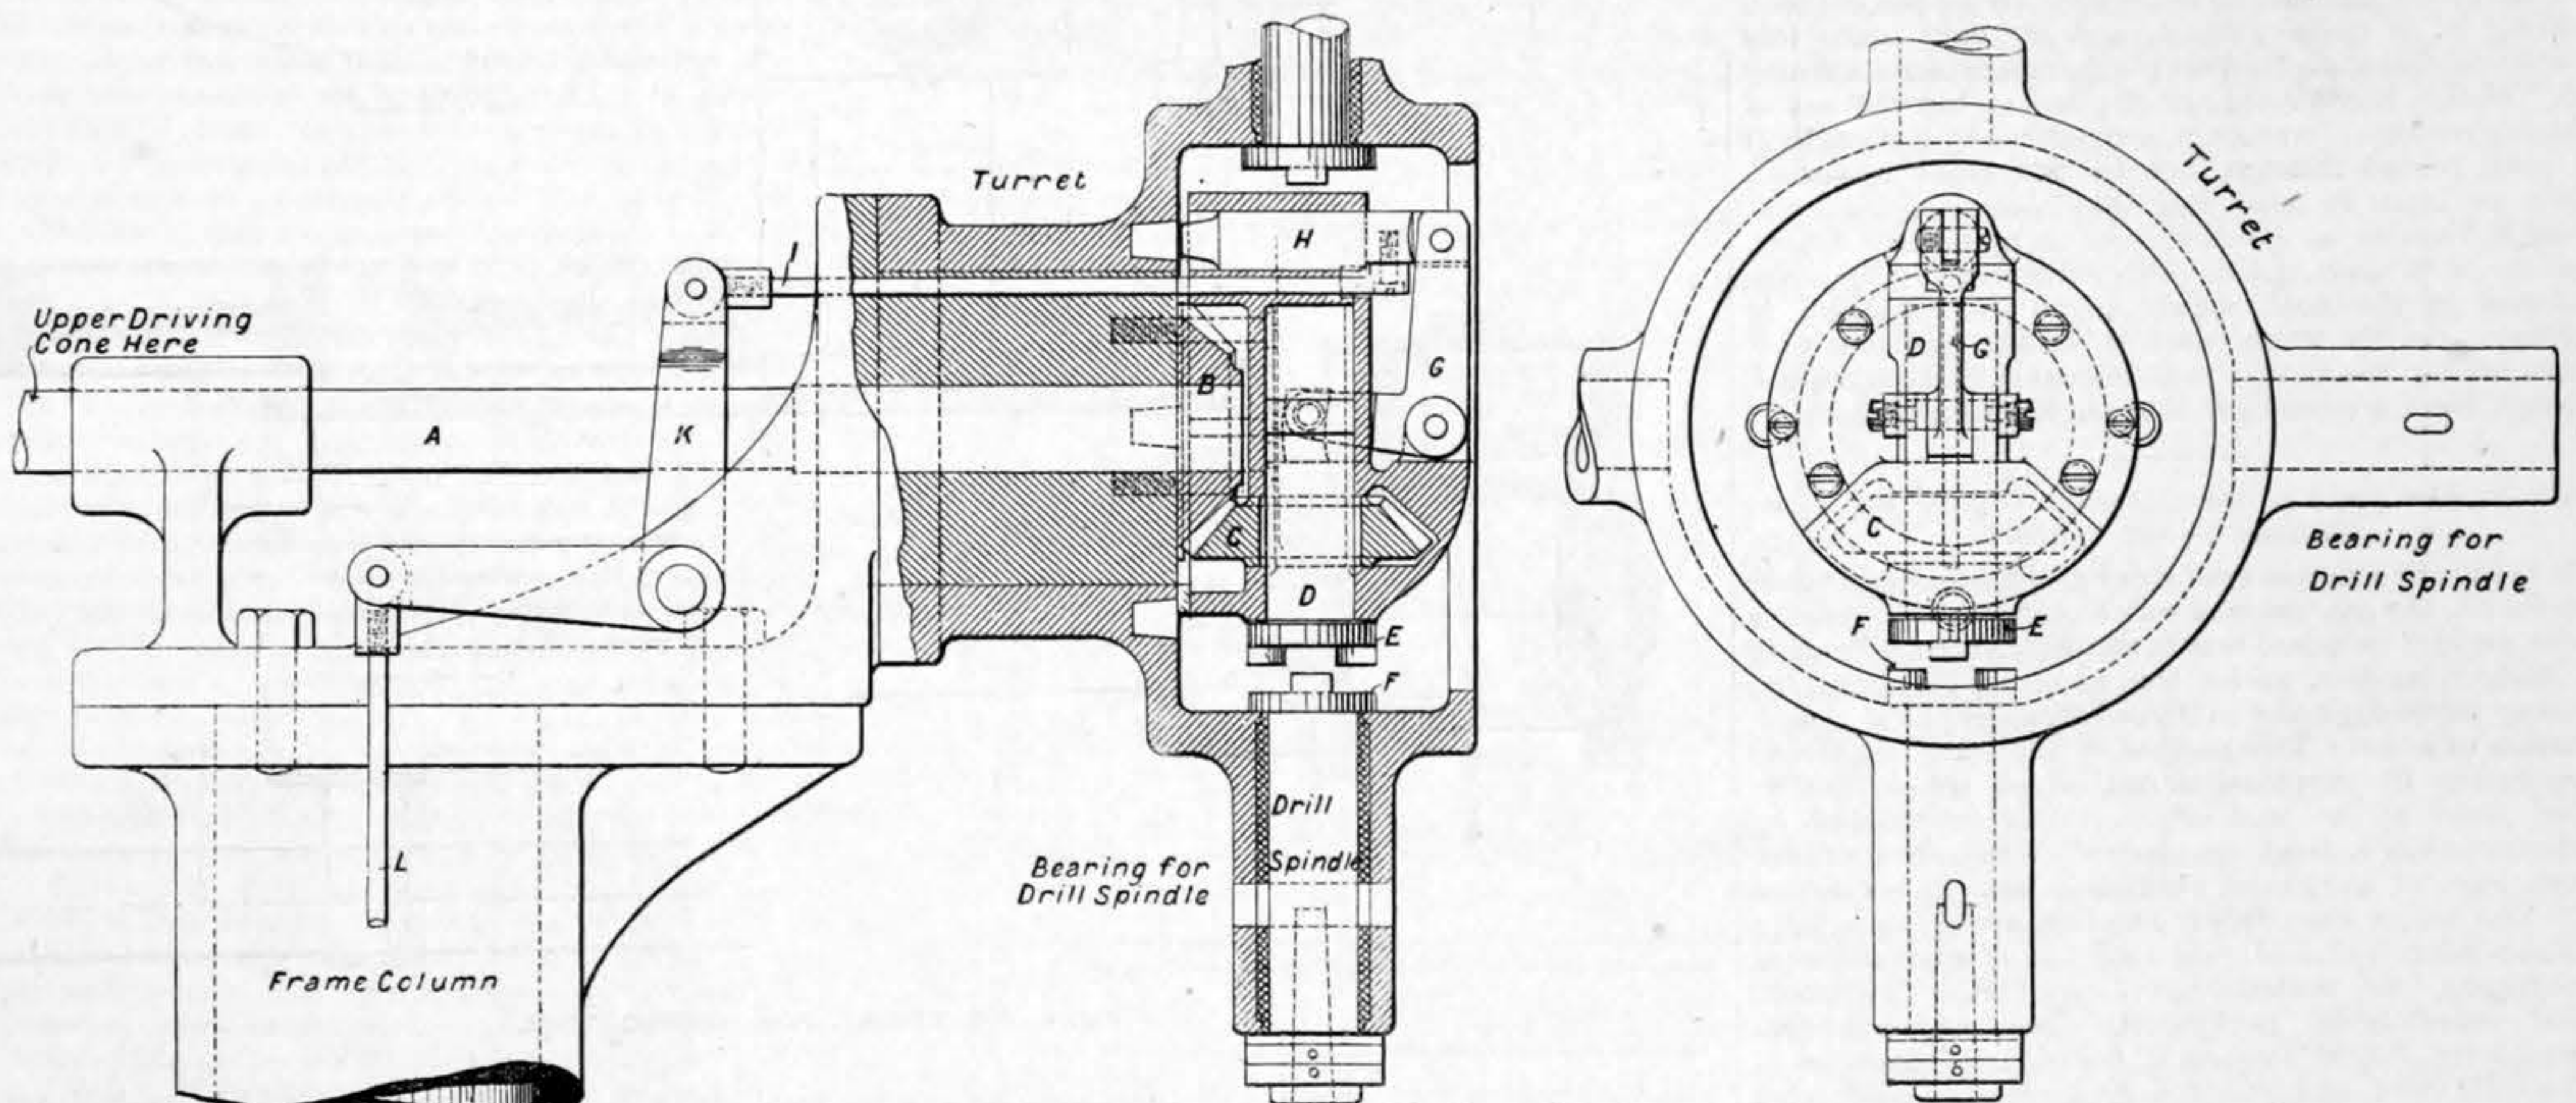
Quint Turret Drill with Bevel Gear Drive.
